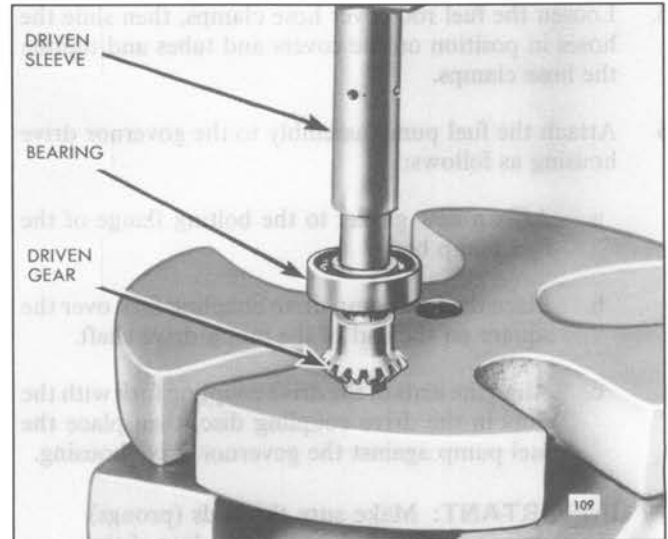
Installing Bearing and Driven Sleeve on Driven Gear
